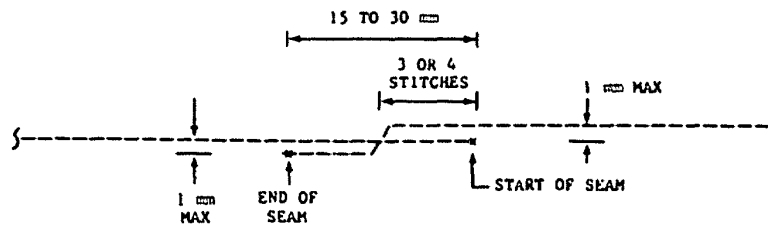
For seams terminating on themselves (plan view - looking down on fabric).
